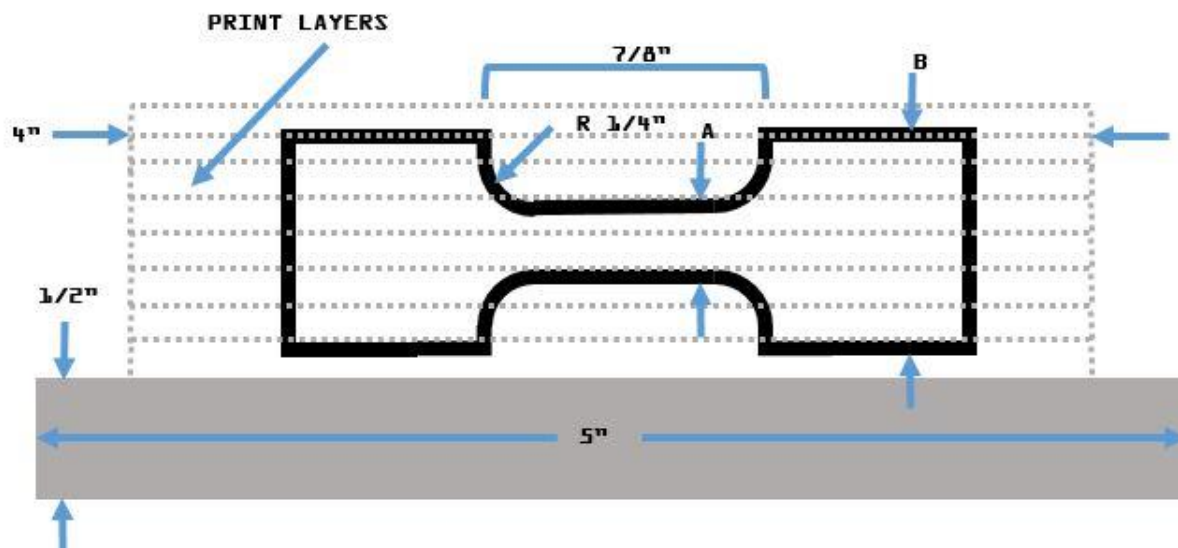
Specimen geometry and location in print. A, B, overall length and thickness vary due to inconsistencies in the print geometry. Prints were milled down to the largest tensile specimen possible.
